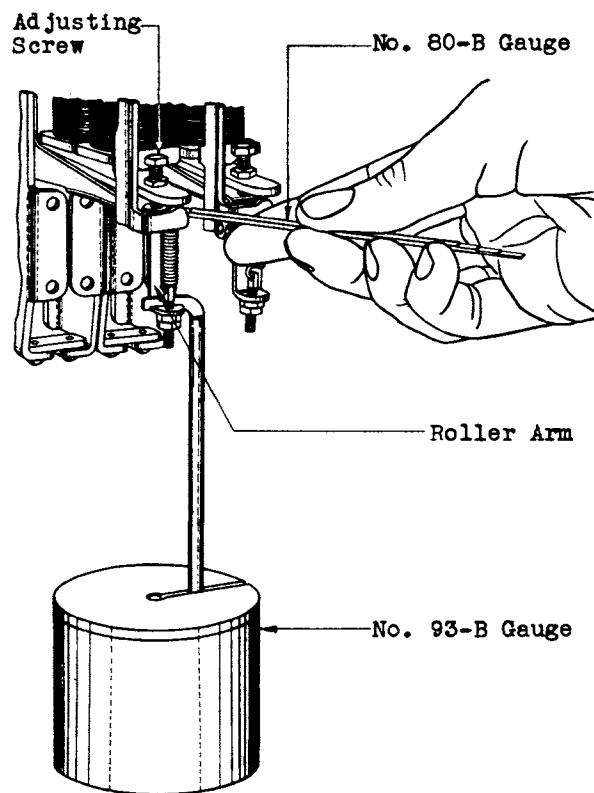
Method of Checking Helical Spring Tension Requirement
